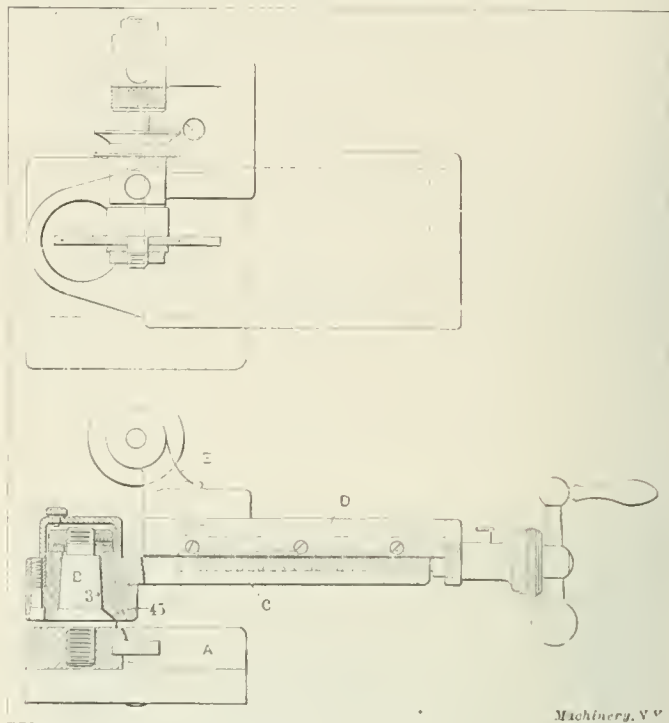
Radial Grinding Fixture used in the Shops of the L. S. Starrett Co.
